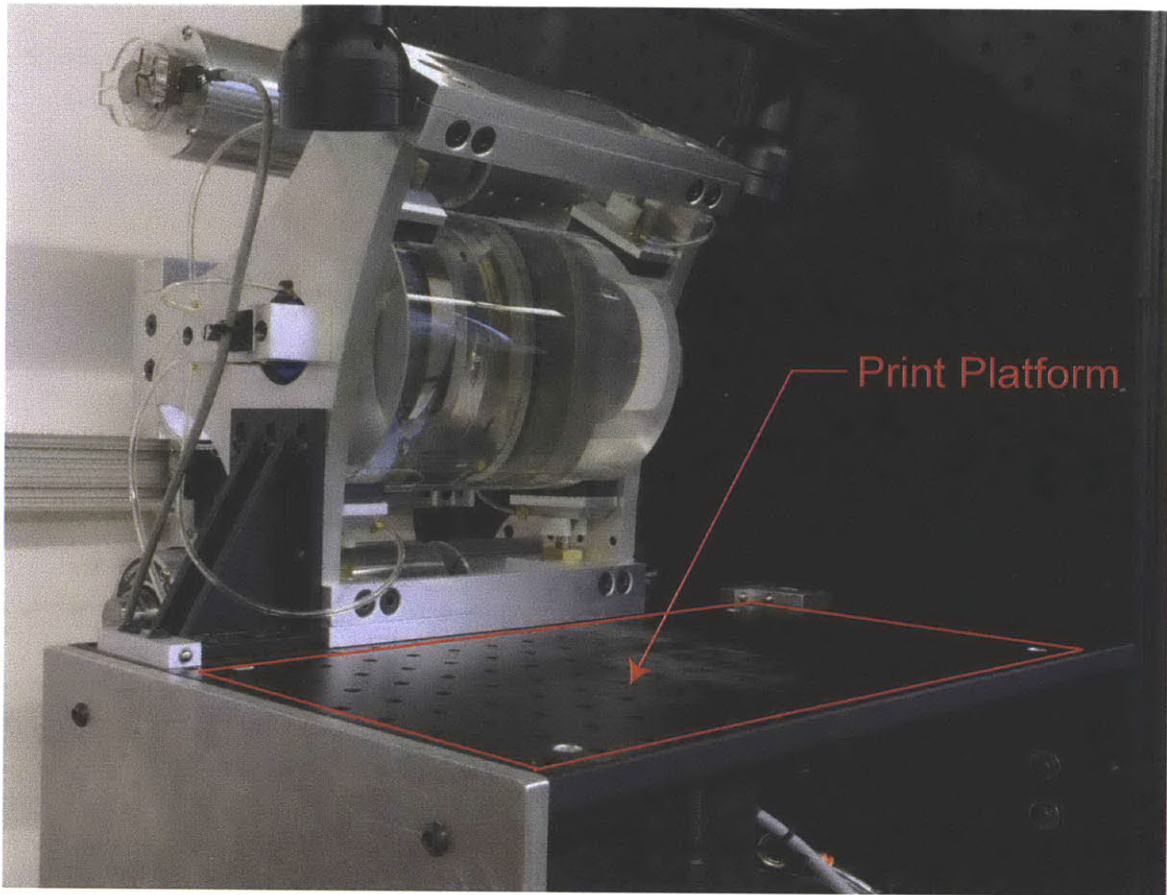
The print platform provides convenient mounting for the impression assembly (pictured) and the print head assembly (not pictured). Note the kinematic hard stops used for repeatable alignment of the print head.
